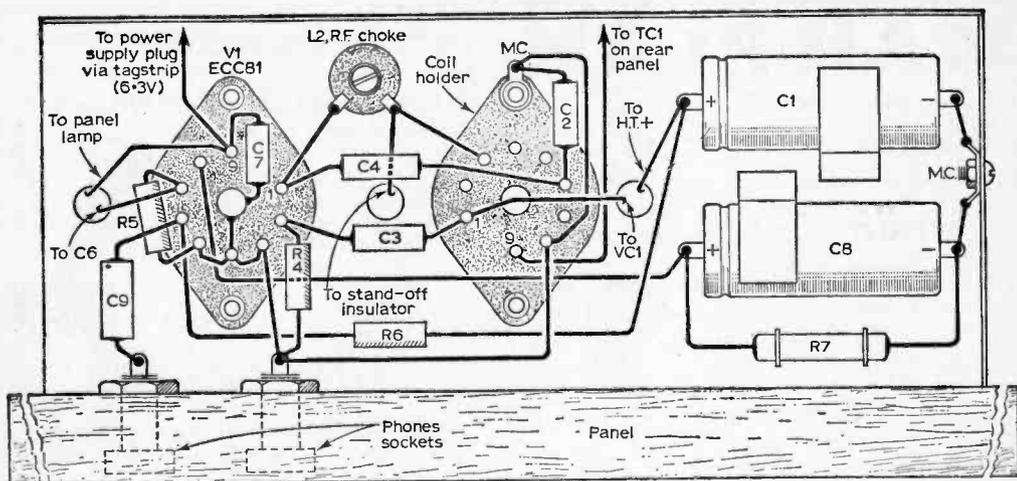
The under-chassis layout and wiring of the receiver unit.
